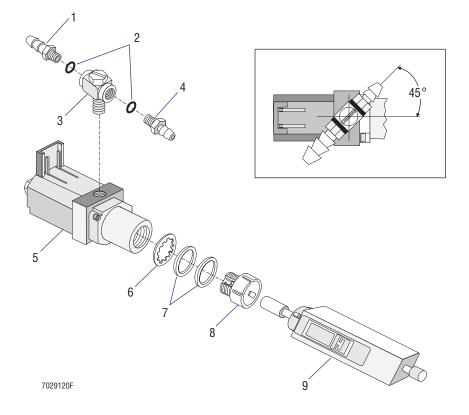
VL21 - Exploded View of Lower Valve (See Table 8.2-17)
